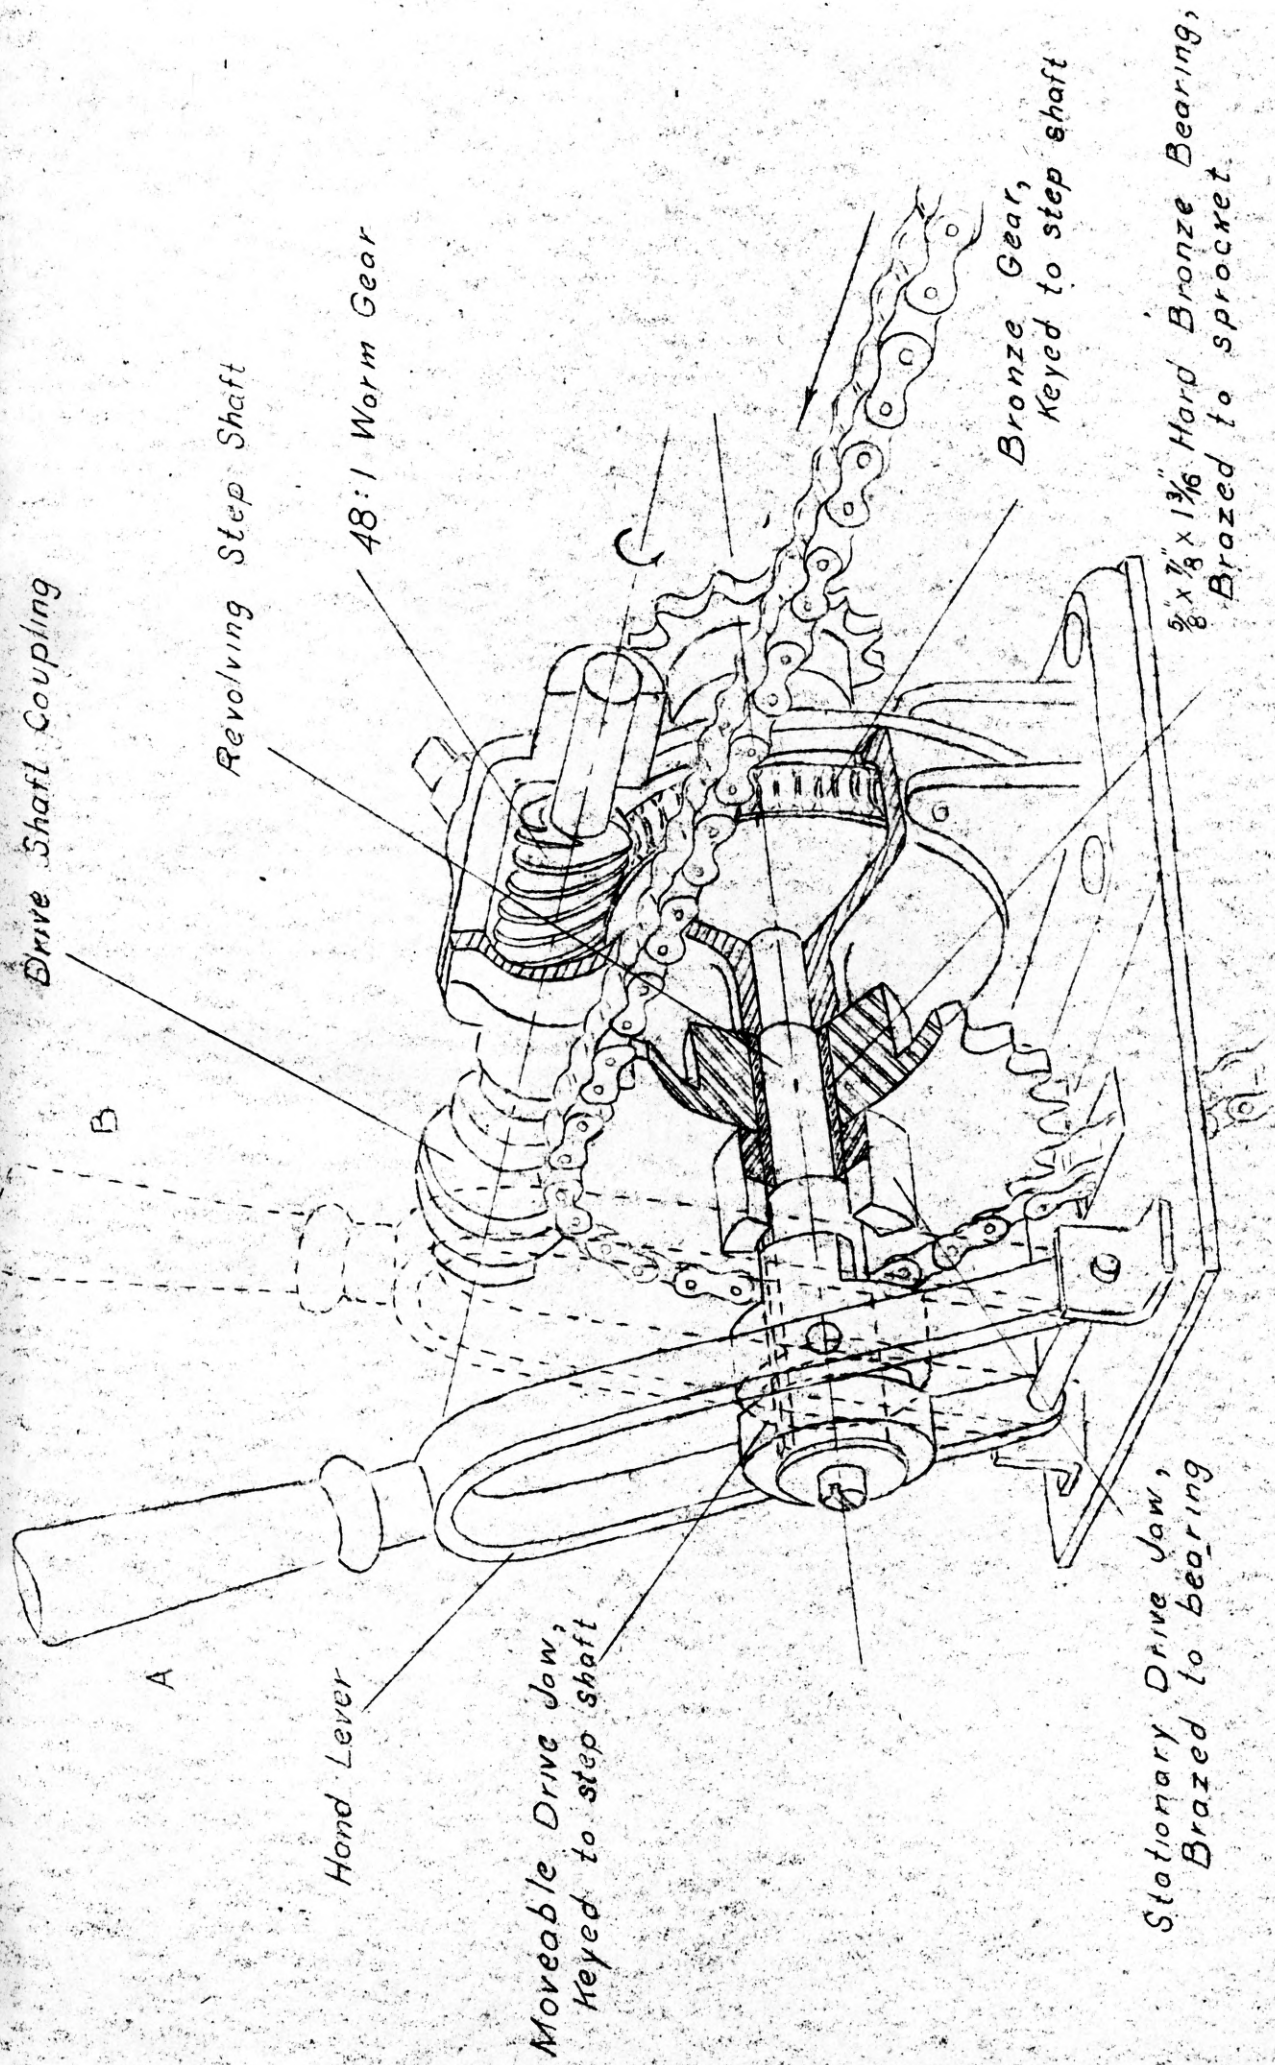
Sketch of Jaw Clutch and Speed Reducer showing working parts:
